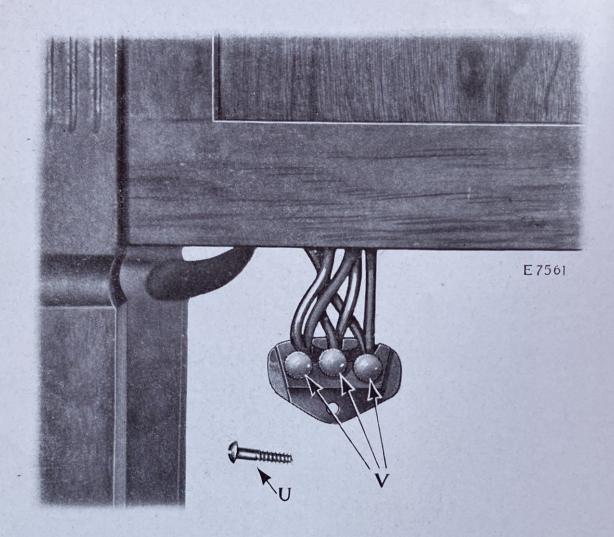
Wiring of Three-Pin Terminal Block for Machine 101-3 on Cabinets 40 and 306
